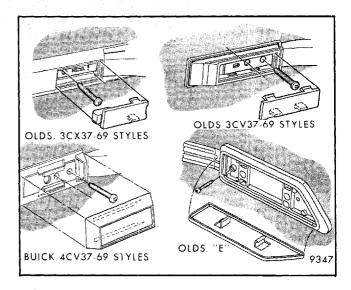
Typical Door Pull Handle Attachment - Buick C and Oldsmobile C and E Styles
